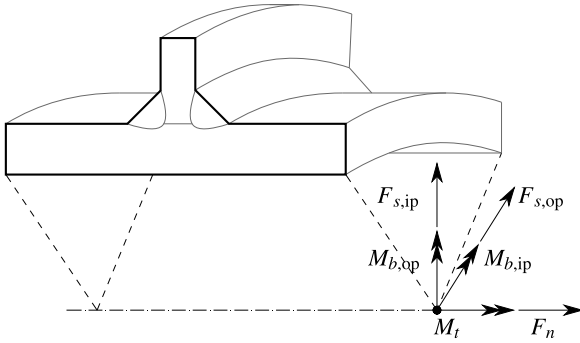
DS welded T-joint in a tubular structure with internal load components.
